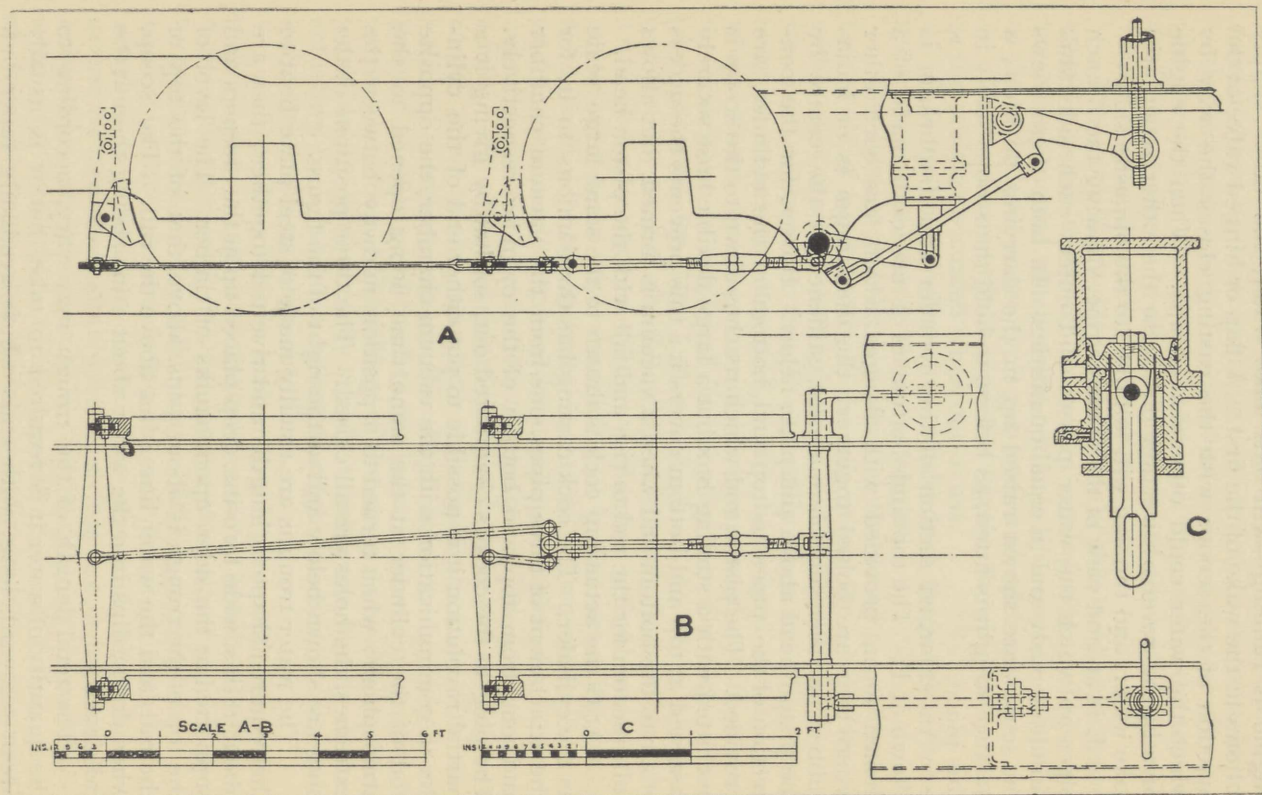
ENGINE BRAKE ARRANGEMENT.
